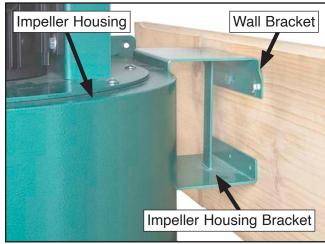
Attaching impeller housing bracket to Impeller housing.
